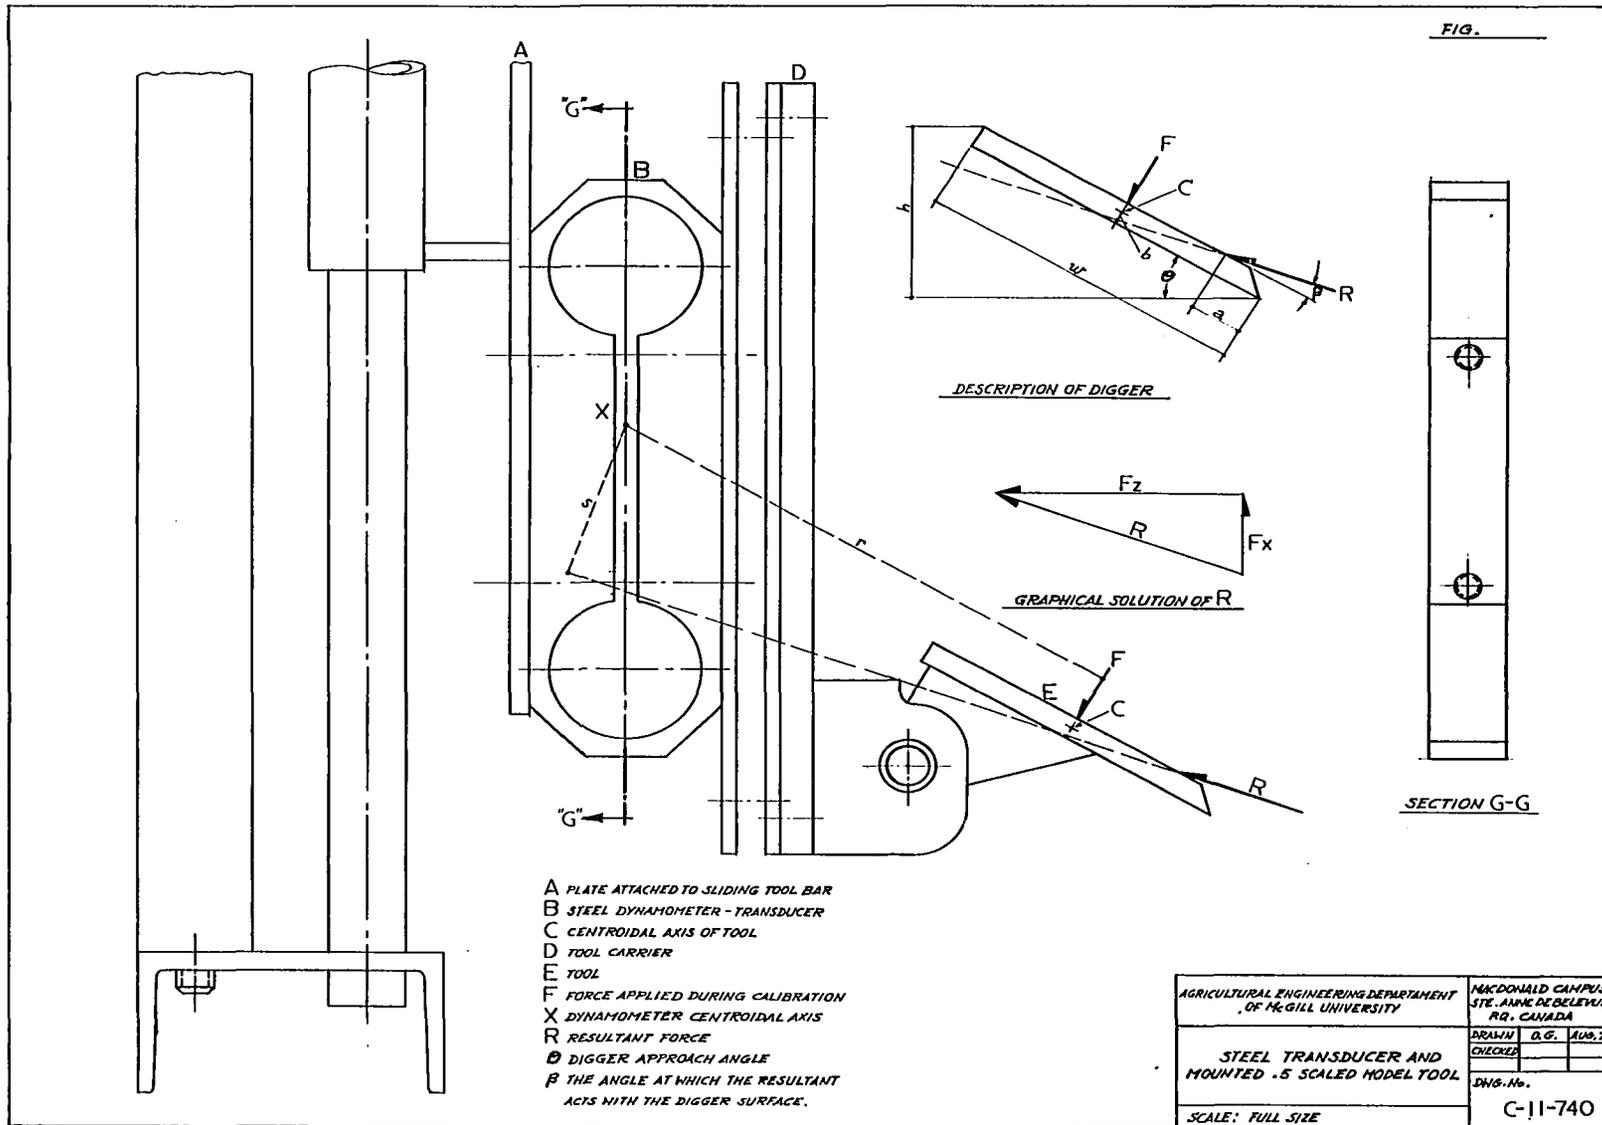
Steel Transducer and Mounted .5 Scaled Tool.
